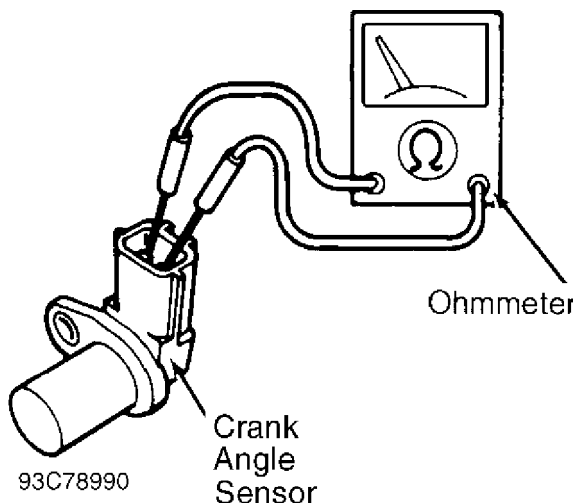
Checking Crank Angle Sensor (RX7 Shown)
